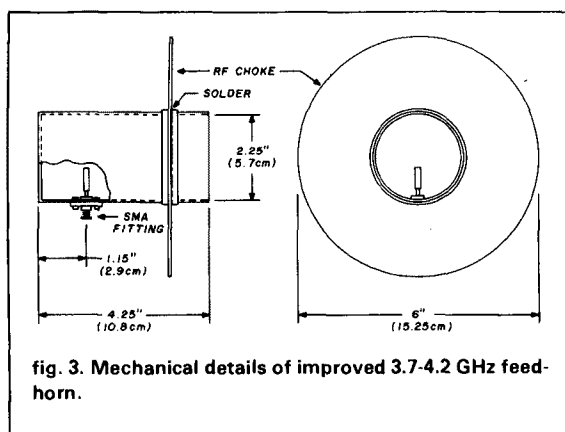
Mechanical details of improved 3.7-4.2 GHz feed-horn.
